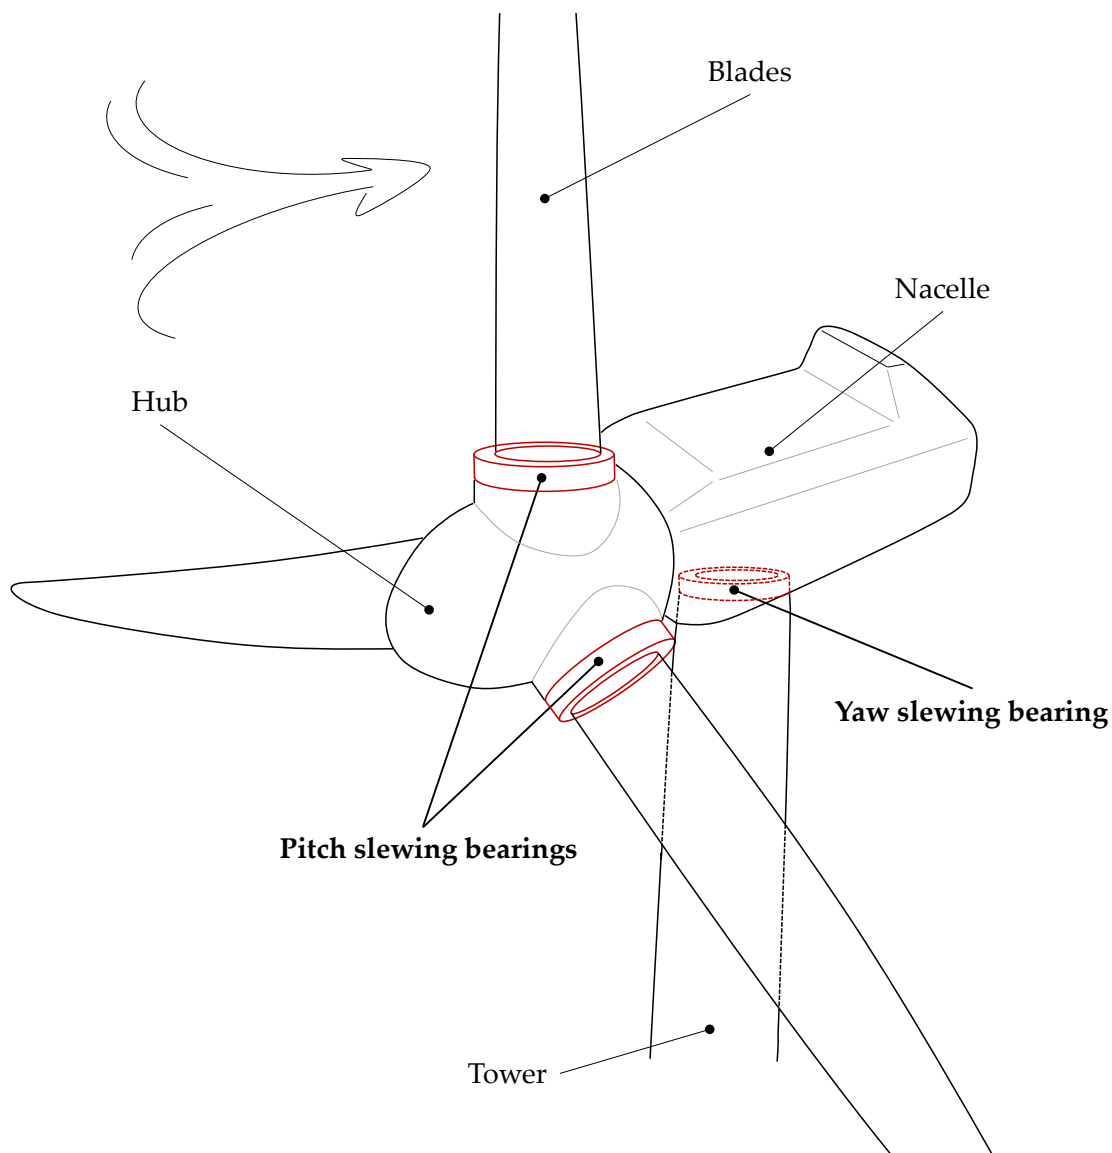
Pitch and yaw bearings of a blade wind turbine.
